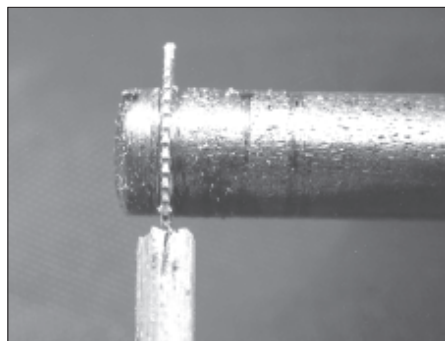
Before inserting the sleeve into the cap, a toothpick was slit using a circular saw on a mandrel.
